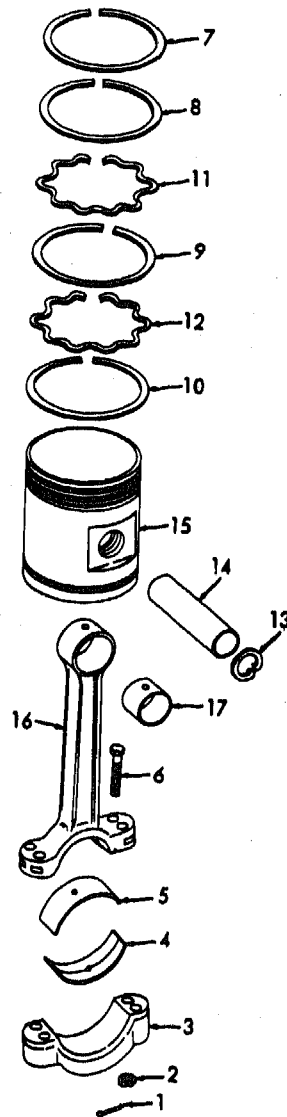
Carrier engine piston and connecting rod assemblies, removal and installation.
